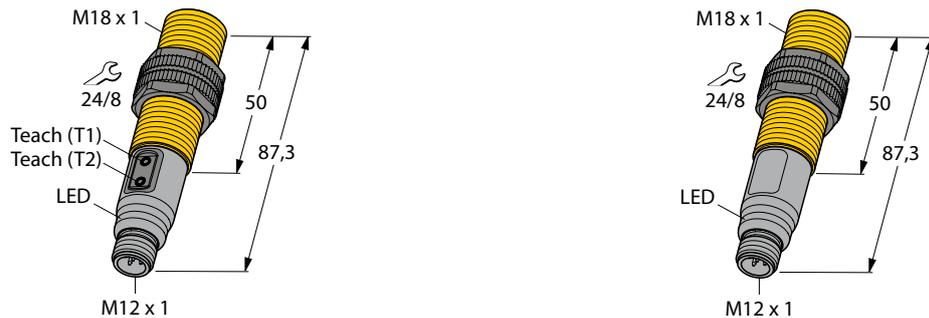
Dimension drawings BCT5-S18-U\*6X2T-H1151 (with teach button) and BCT5-S18-U\*6X2-H1151 (without teach button)
